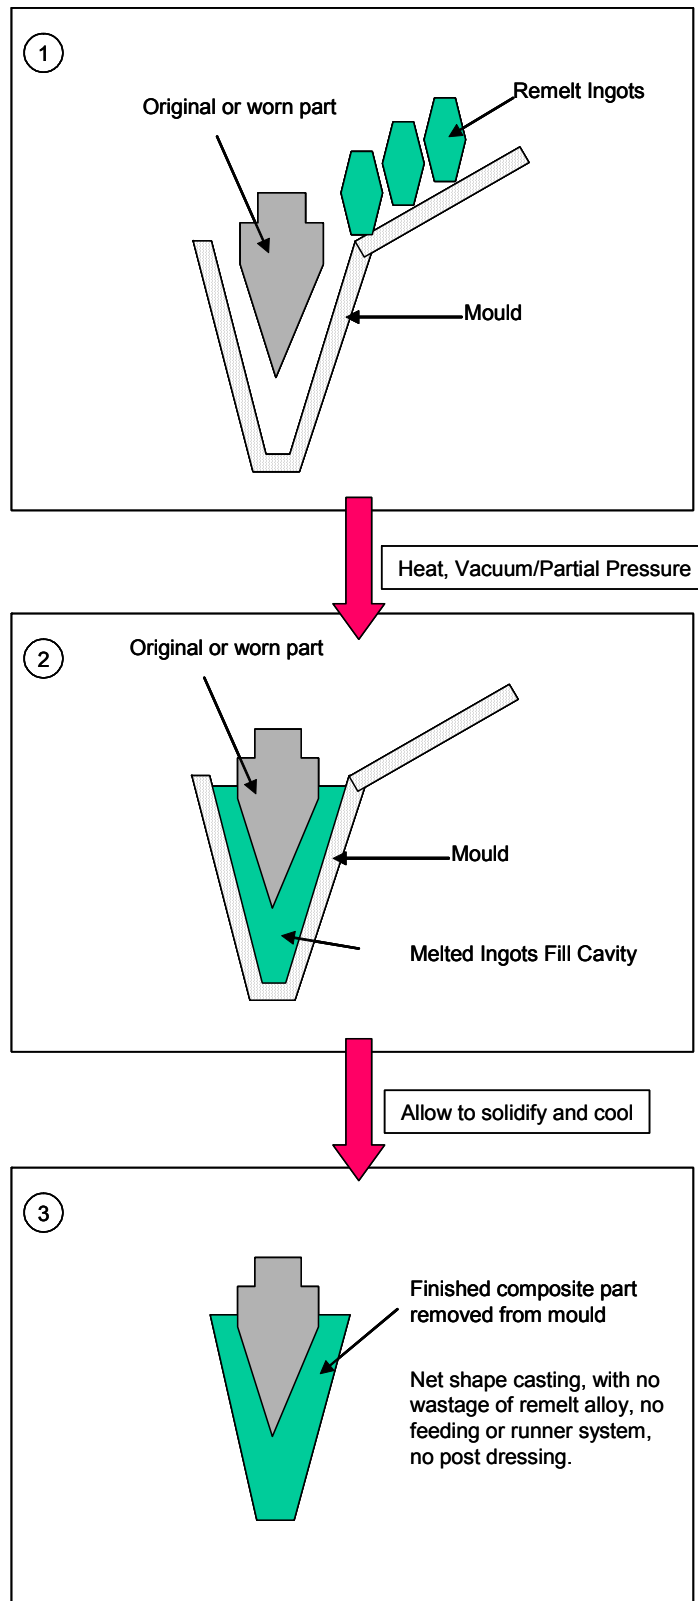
Typical mould arrangement for suction-cutter dredge bucket teeth
